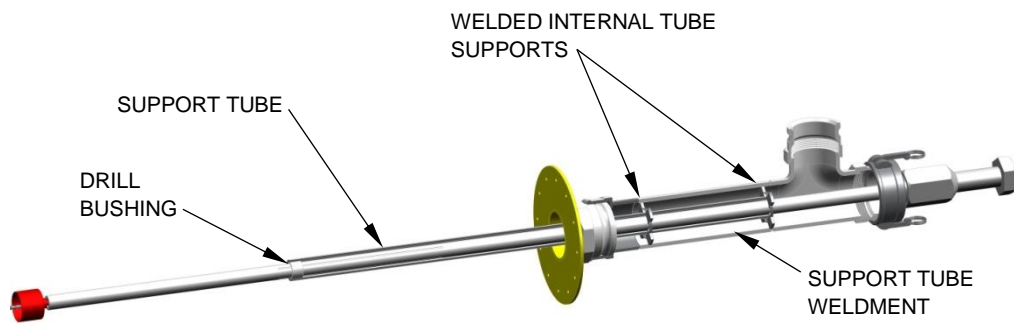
Cross Section of the Prototype Hot Tap Extension Tool
